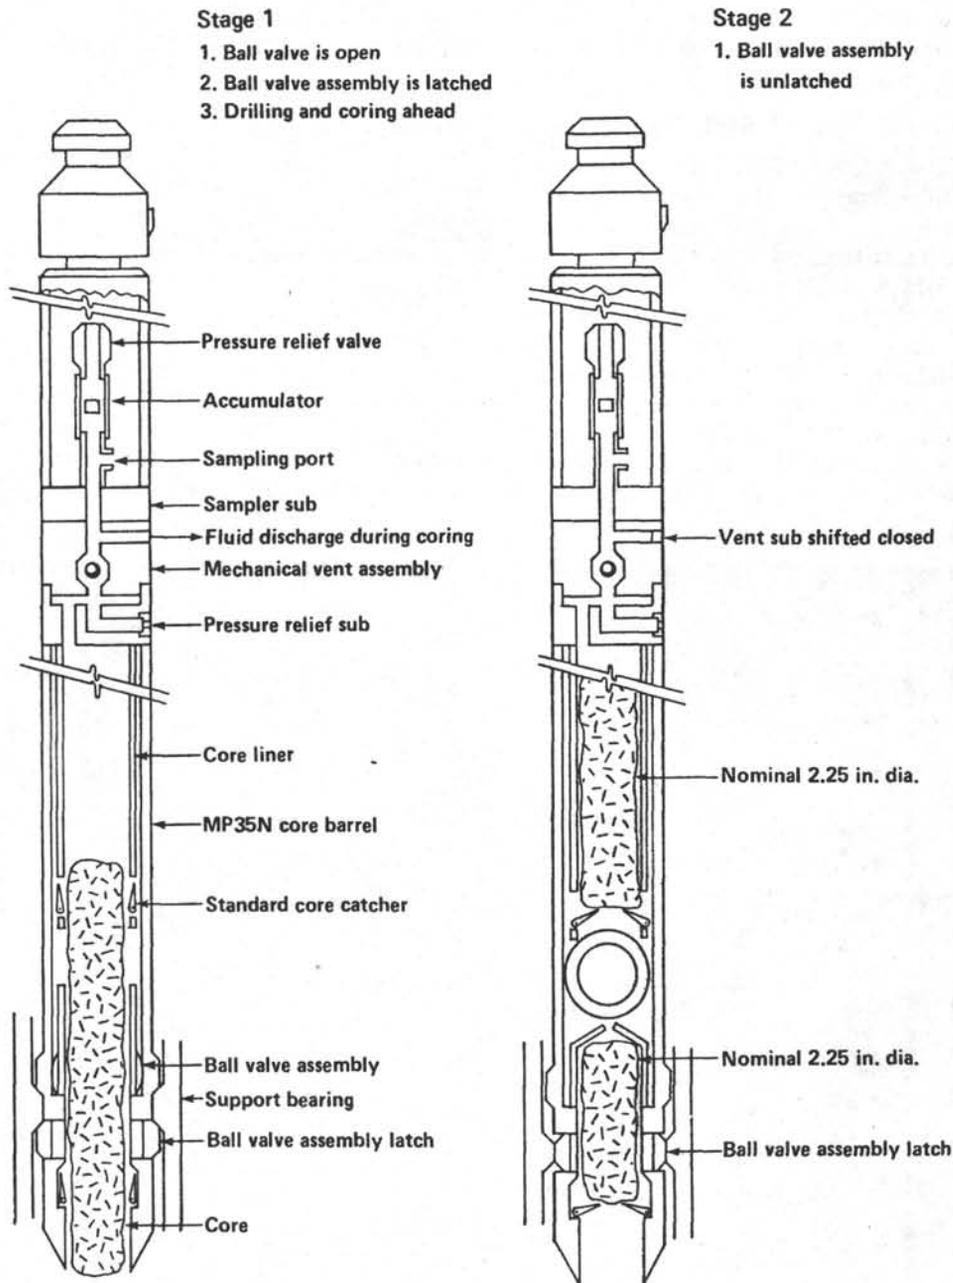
Mod. III pressure core barrel. (Stage 1 shows the configuration of the PCB during drilling and coring with the ball valve open and the ball valve assembly latched to the drill pipe. Stage 2 shows the configuration of the PCB during core recovery. The ball valve and vent sub have closed, sealing the pressurized core in the pressure chamber. The unpressurized core is held in place at the lower end of the tool by a core catcher. The PCB has been unlatched from the drill pipe.)
